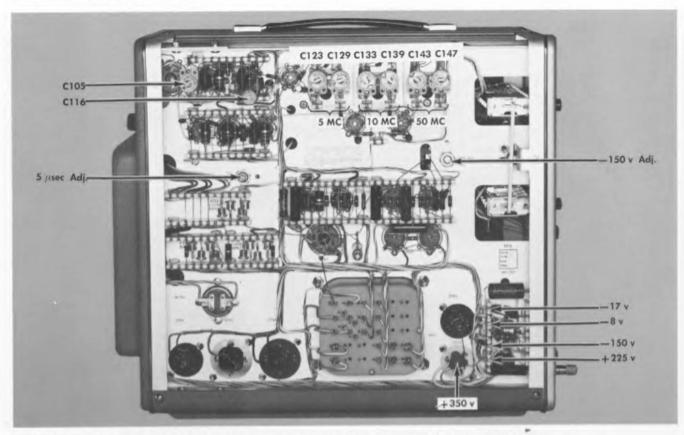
Left side view showing voltage reading points and calibration adjustments. This covers 5/N 6386 up.
